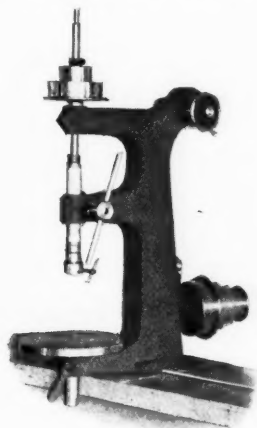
No. 26 Bench Drill equipped with Lever Feed
